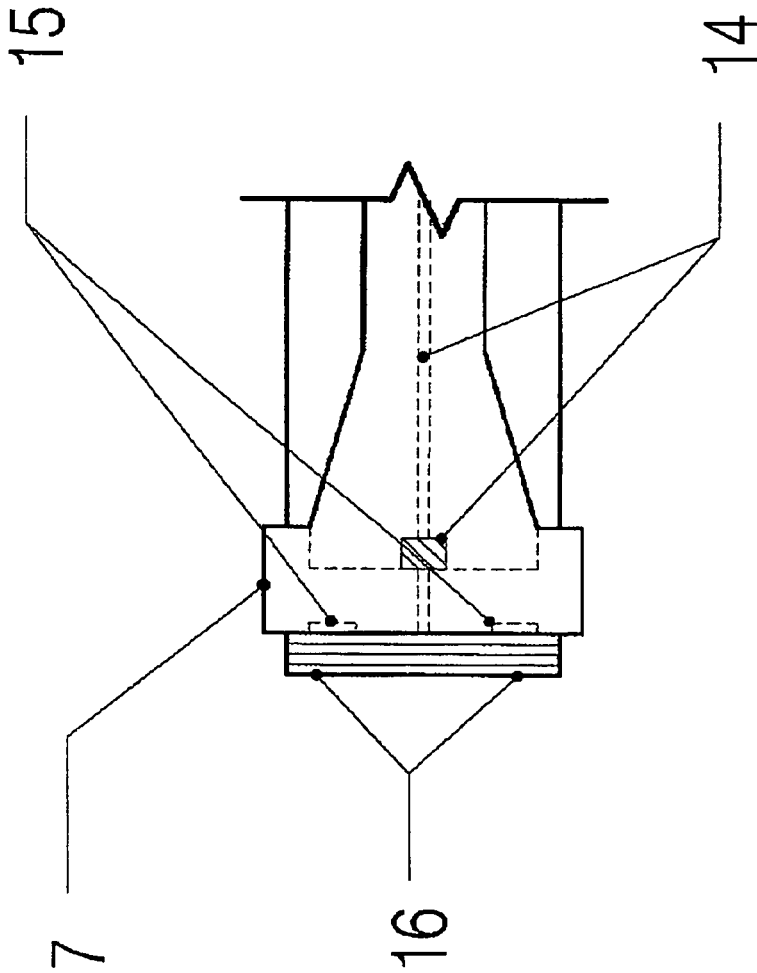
Handheld retractable nozzle. Side view of water chamber splitter
